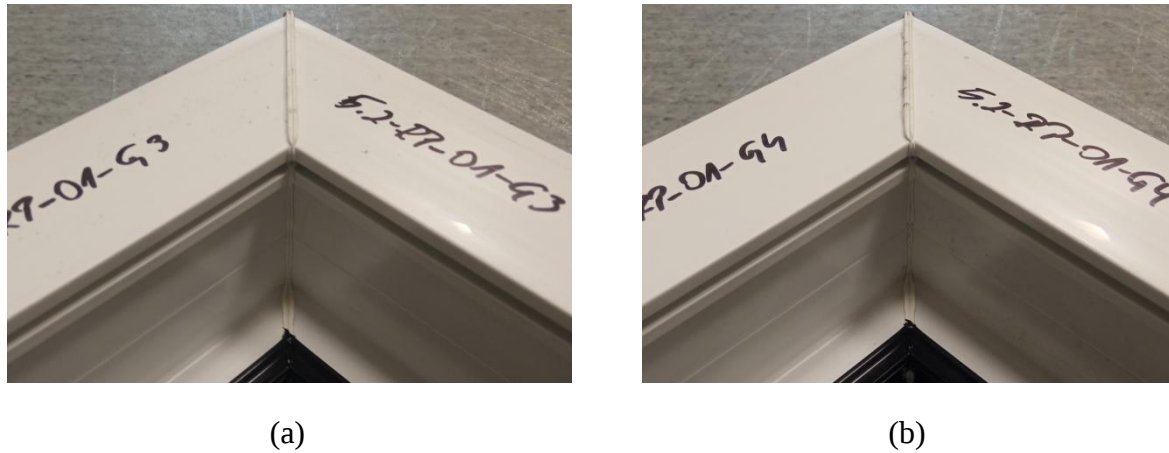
Representative welds from preliminary specimens: (a) third welding head, (b) fourth welding head. Source: Author's own work
